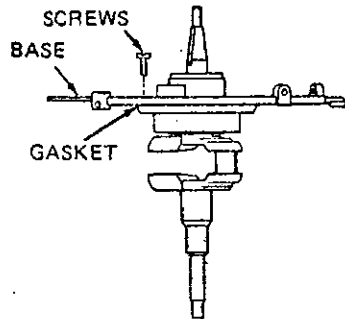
Types 642 and 643 base assembly and crankshaft are removed together from the cylinder.
